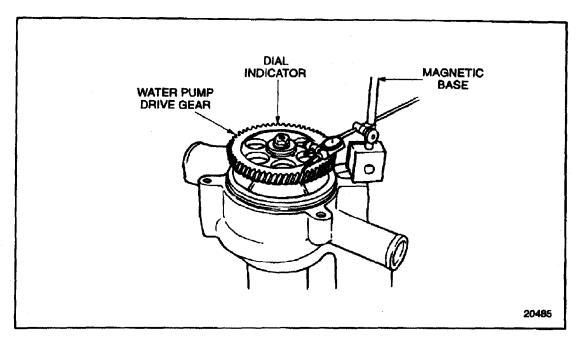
Measuring Water Pump Drive Gear Runout (GCM)
